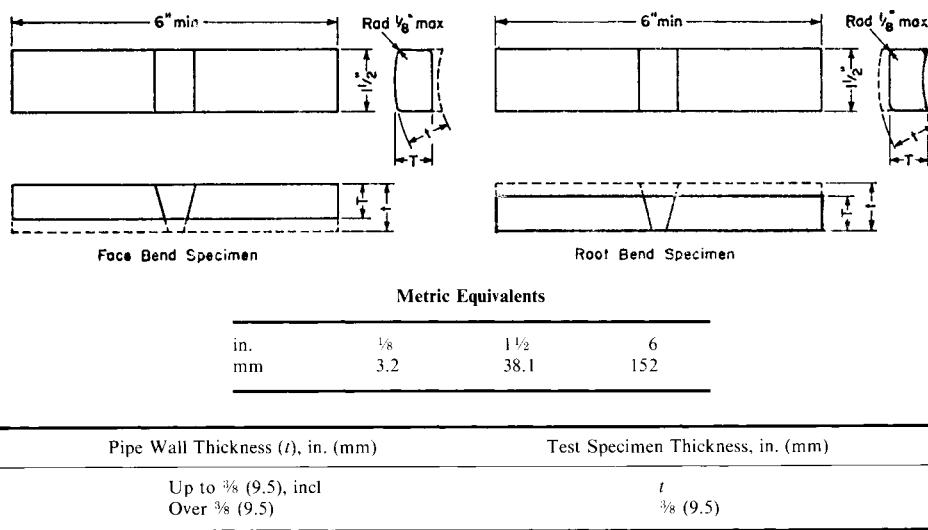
Transverse Face- and Root-Bend Test Specimens
